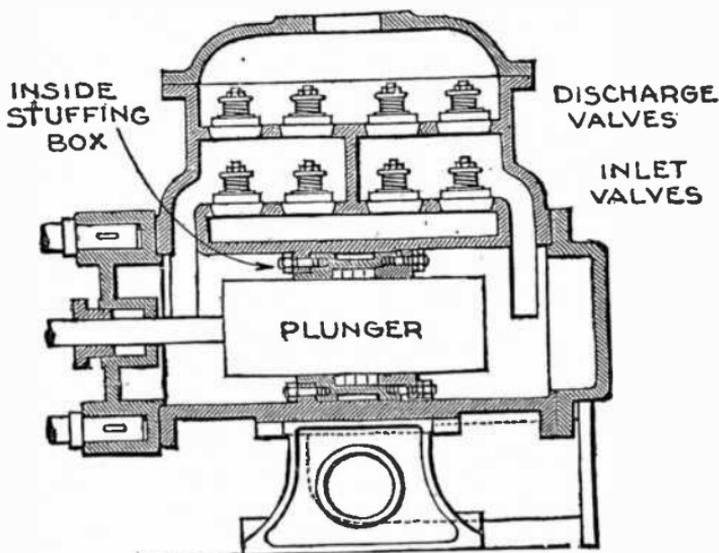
,822.—Double acting inside packed plunger pump, water end showing sectional view of working parts.
